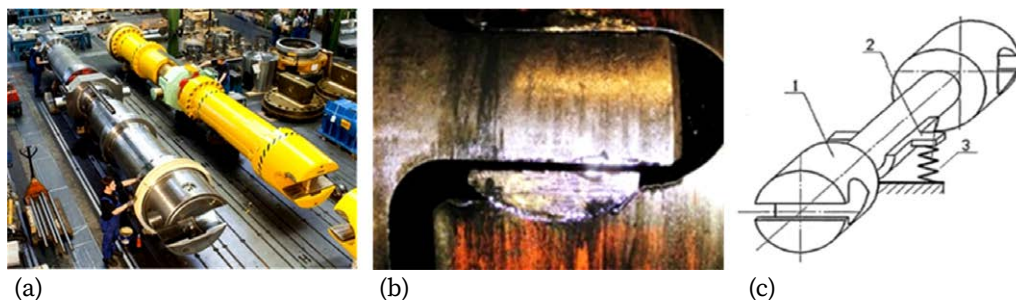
(a) Spindles with slipper pads; (b) wear of slipper pads; (c) weight balancing scheme: 1 – head of spindle; 2 – journal bearing; 3 – two balancing springs
